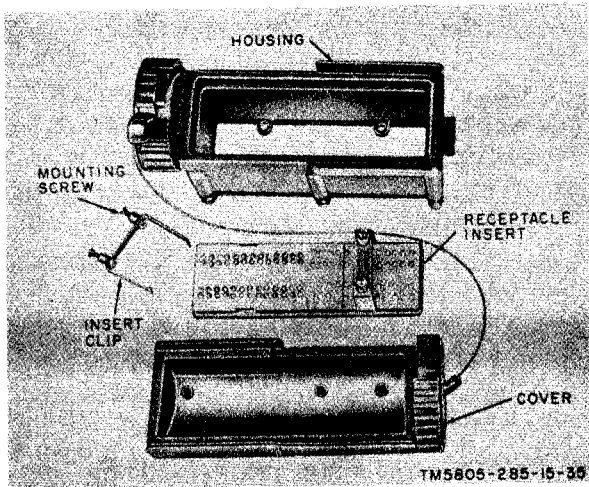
Cable receptacle, 26-pair, partially disassembled.
